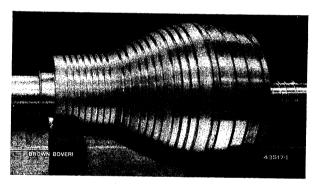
Rotor turned up ready to be bladed and composed of discs welded together.
